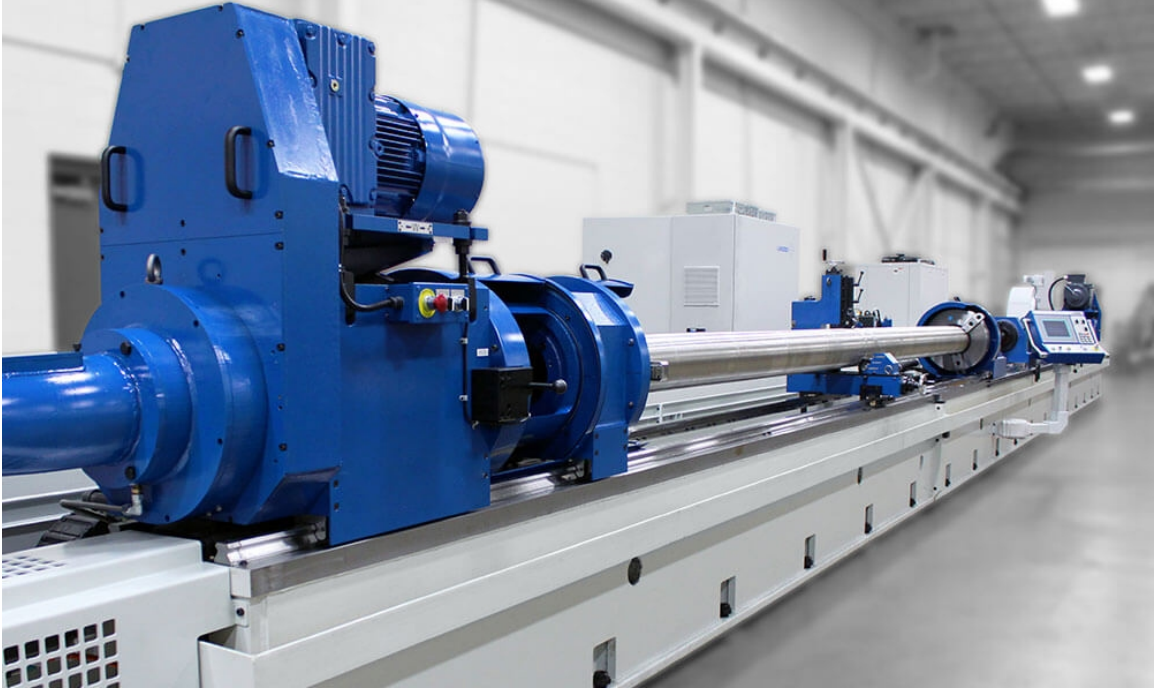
A conventional BTA deep hole drilling machine [35].
